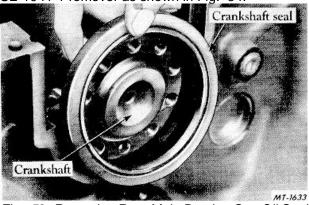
Removing Rear Main Bearing Cap Oil Seal from Crankshaft
